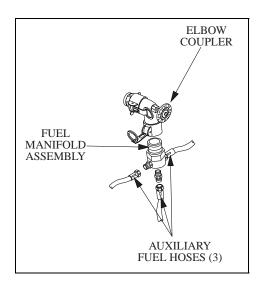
Coupler elbow valve with adapter, fuel manifold assembly, and hoses
